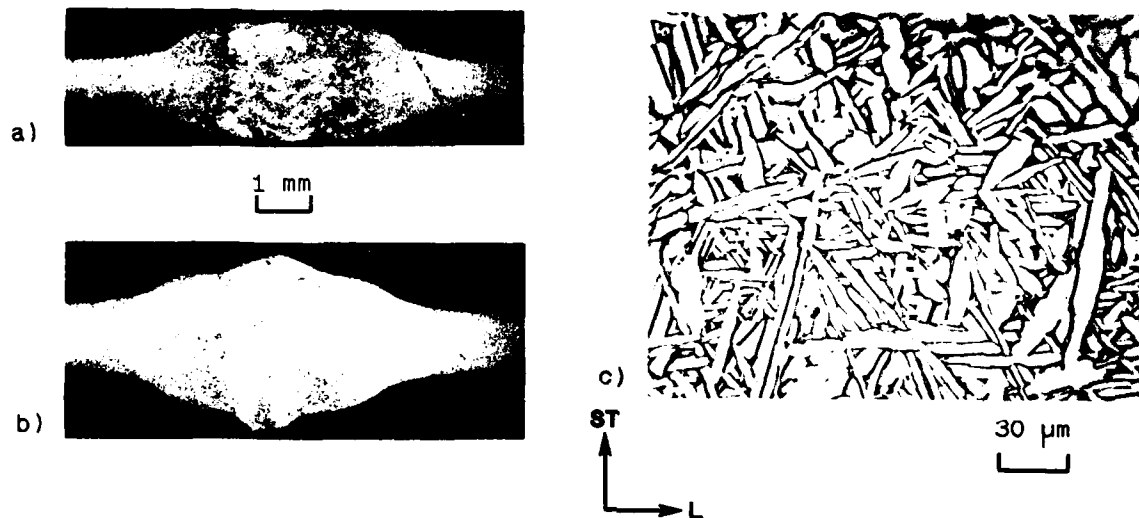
Section through (a) machined and (b) unmachined T-orientation test pieces after 300% extension at 925°C. (c) Fusion zone microstructure of unmachined test piece after deformation.
